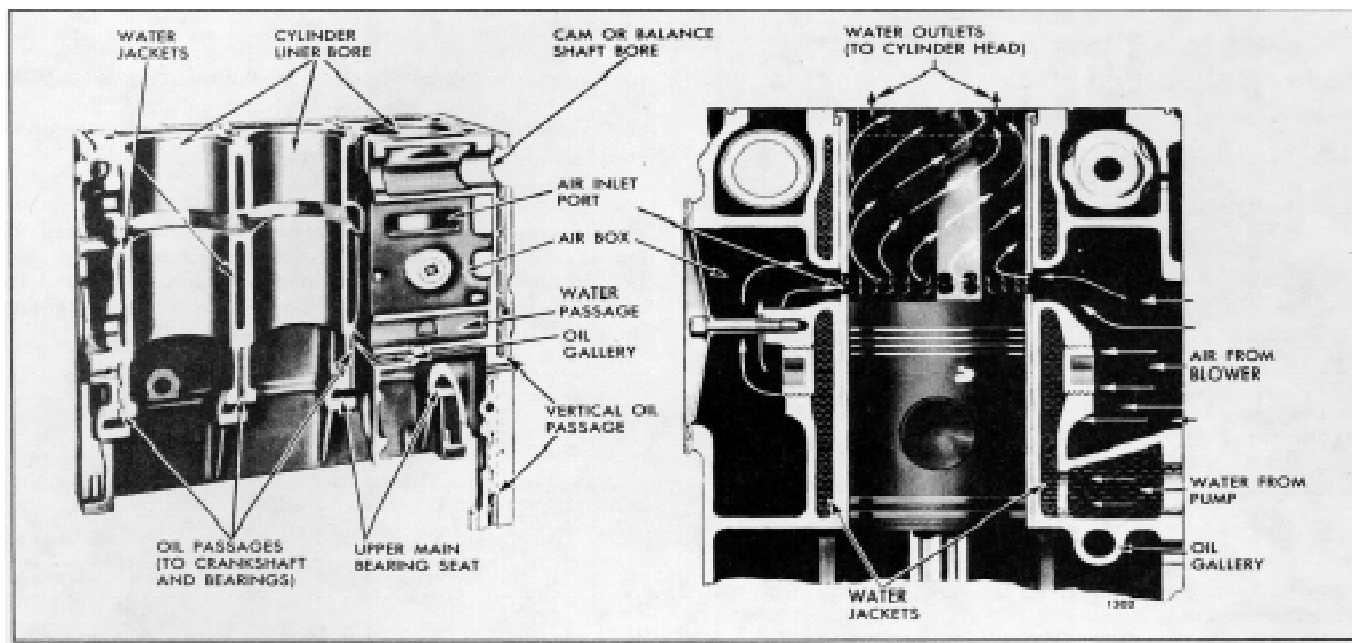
Cutaway View of Cylinder Block Showing Air and Water Passages
